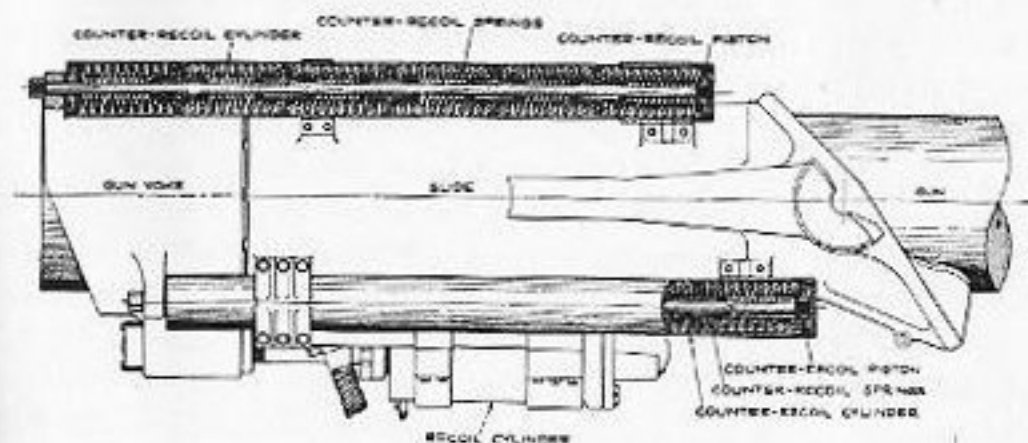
TYPICAL SPRING COUNTER-RECOIL SYSTEM FOR TURRET MOUNTS.
